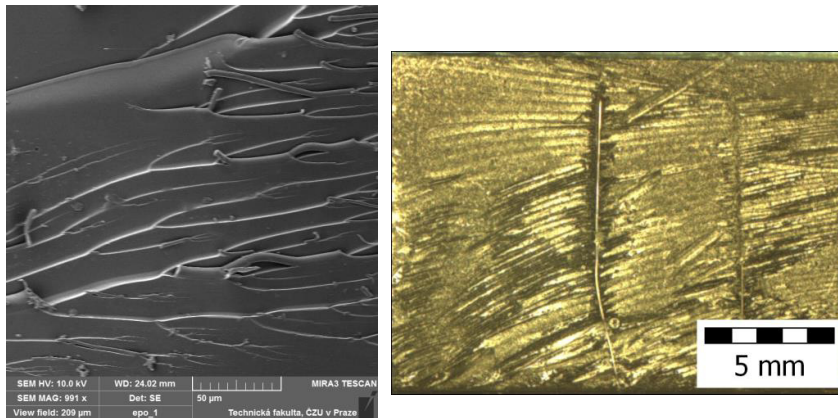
Fracture surface of adhesive type (adhesive C): macroscopic view on fracture surface (right), SEM fracture surface (left).
